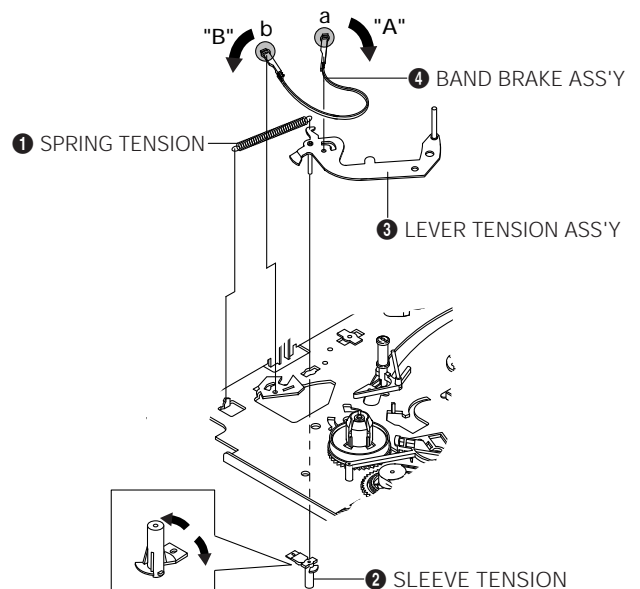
Lever Tension Ass'y, Band Brake Ass'y, Sleeve Tension Removal
